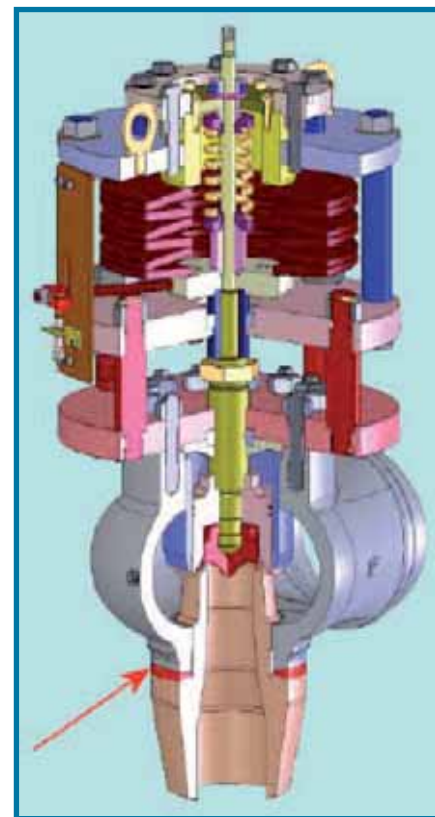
Main steam safety valve "Si9507" for the Chinese nuclear power plant Taishan 1+2 and position of the weld (red arrow).
